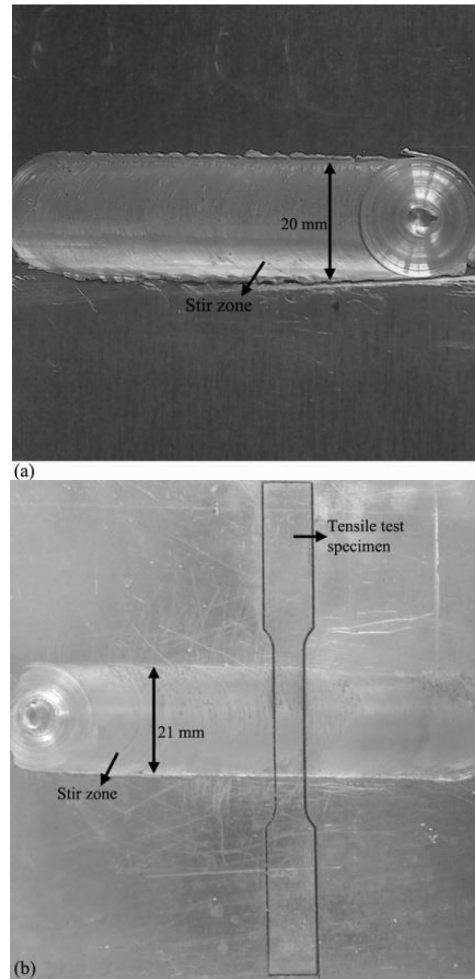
Pictures of (a) friction stir welded (sample 1 of Table 2) and (b) friction stir vibration welded (sample 8 of Table 2) specimens
